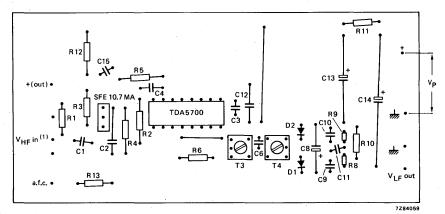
Component side of printed-circuit board (test circuit Fig. 6).
